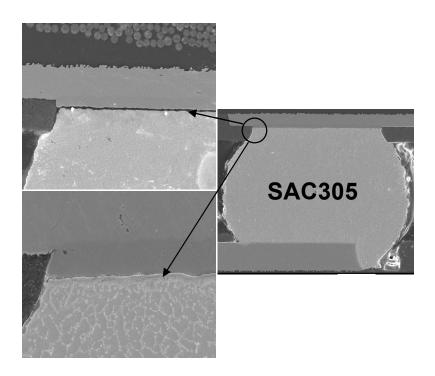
Failure Modes observed in SAC305 Solder Joints
